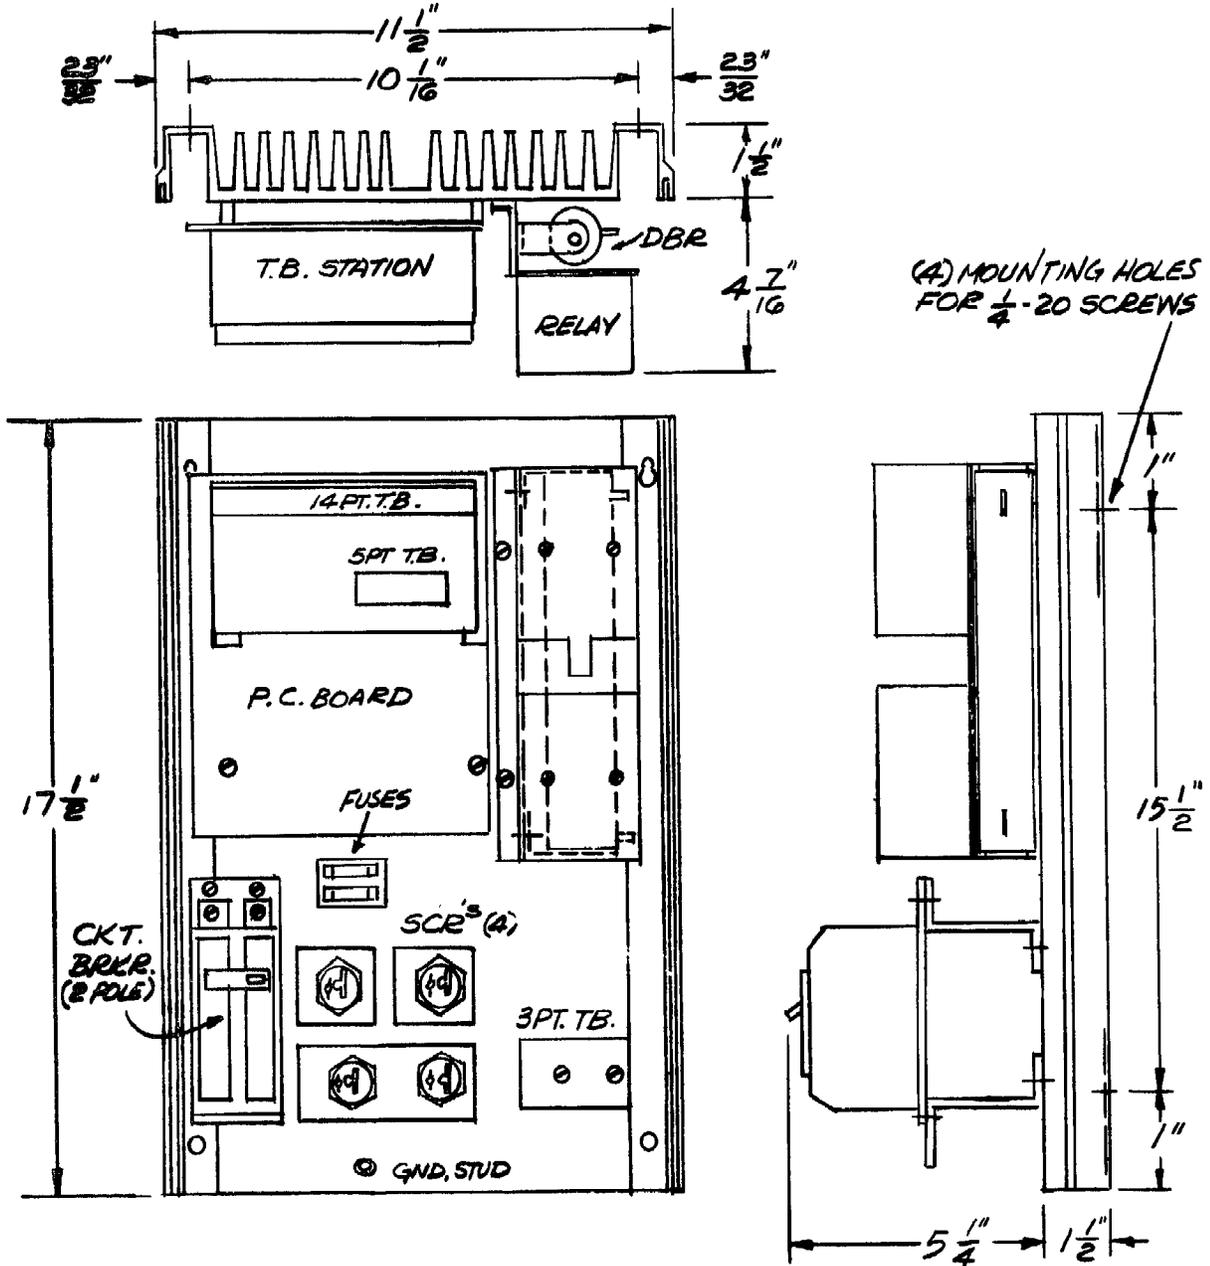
Outline and Mounting Dimensions for Chassis Mount Controller (3 and 5 HP) for use with Remote Control Station
